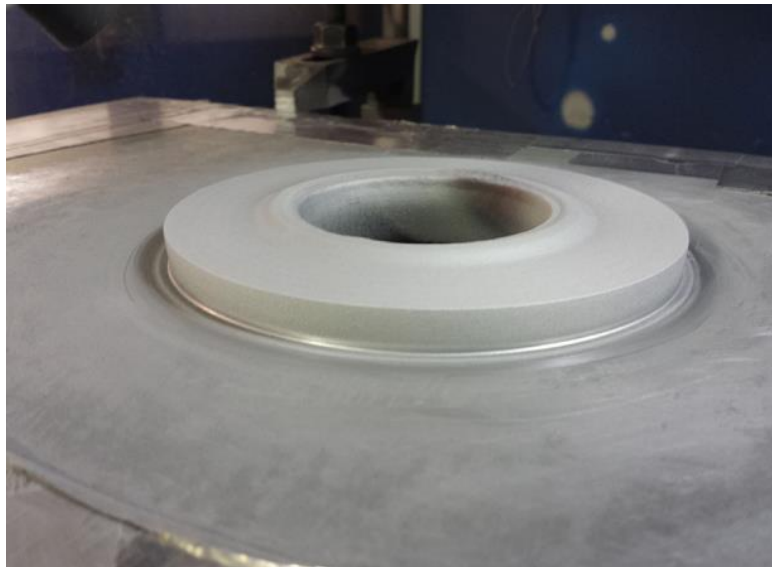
10. Navy bore actuator after being repaired with a CSAM metal coating which added a new layer of material to the corroded surface [1].
